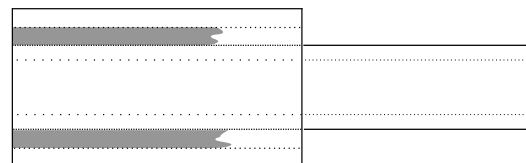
Improved tube soldering technique. Drawings not to scale.
